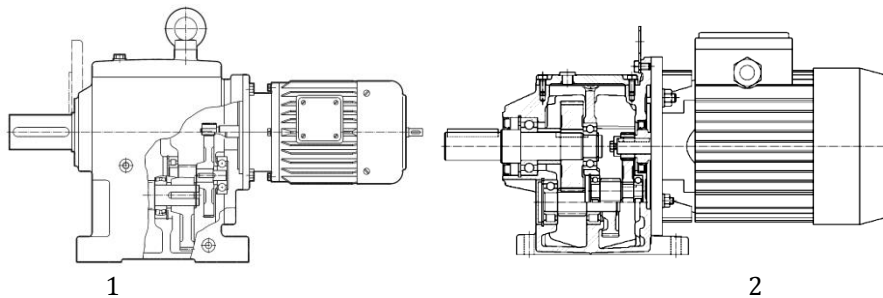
Characteristic solutions of three-stage universal gear reducers manufactured in universal housing for two-stage and three-stage gearbox: (1) Nord and (2) Rossi.
